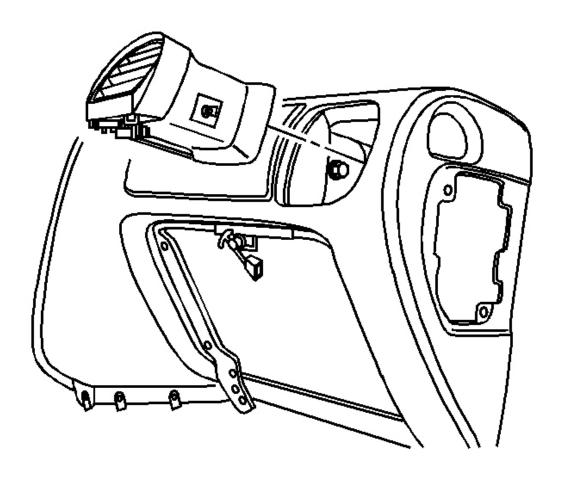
Removing/Installing Air Duct Extension Courtesy of GENERAL MOTORS CORP.
